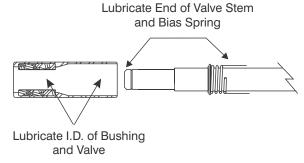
Lubricate the Valve Stem and the Valve Bushing.
